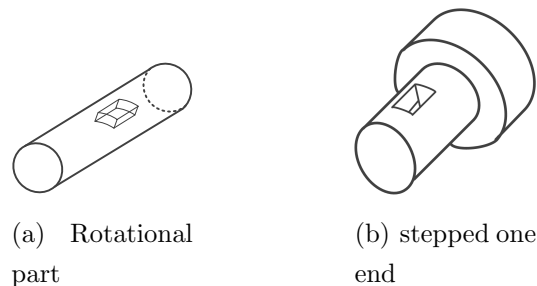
(a) Rotational part with a groove smooth, (b) stepped to one end
